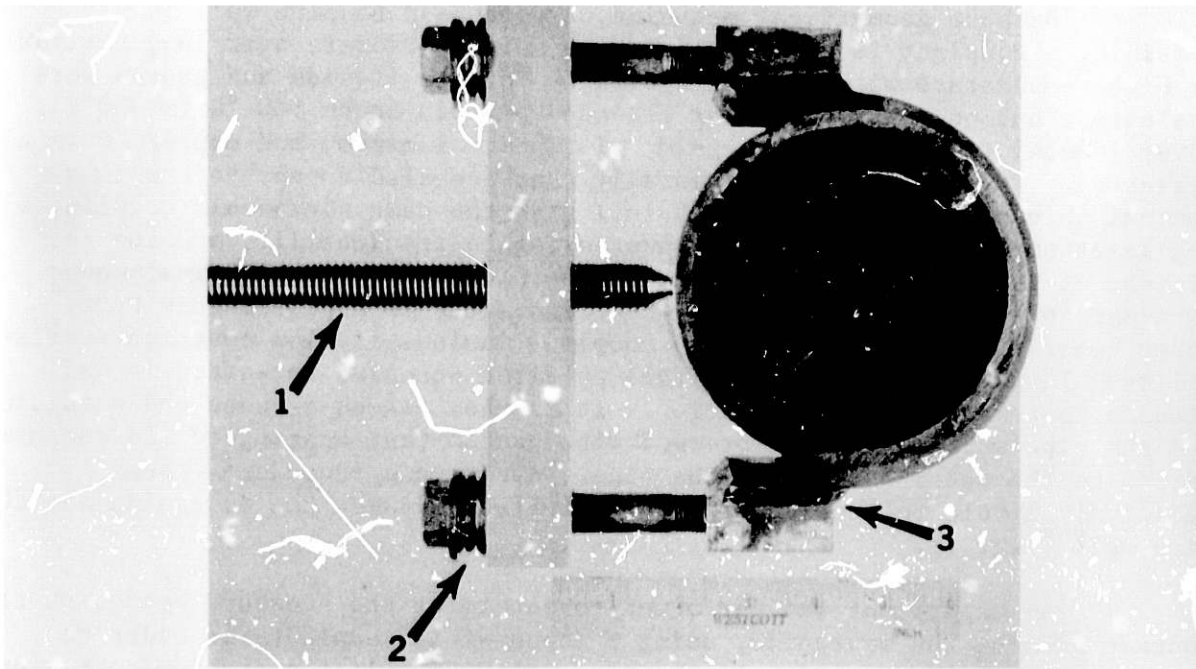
Pressure-coupled Waveguide Assembly Shown Mounted on Pipe Section.
